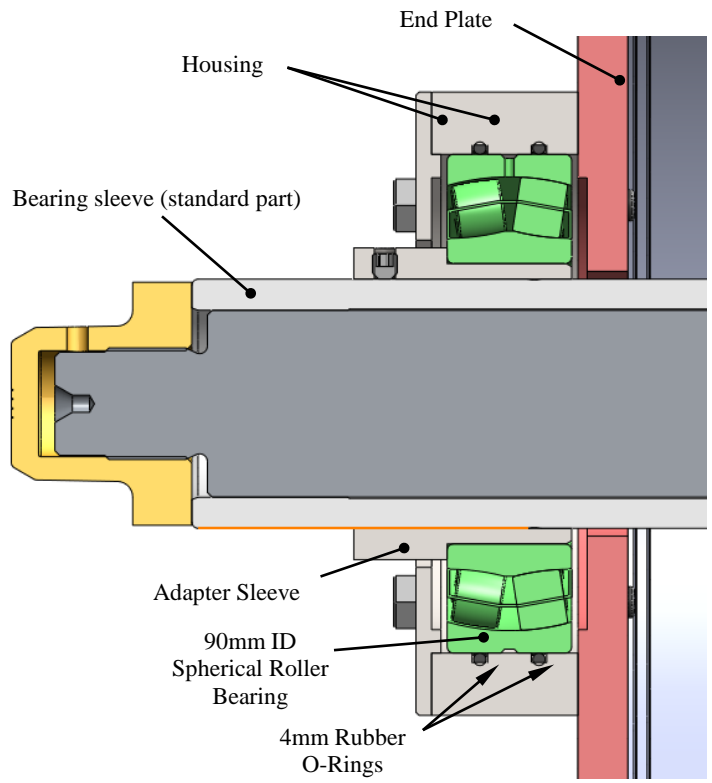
Annotated Partial Section View of the Spherical Roller Tailpipe Bearing Assembly
